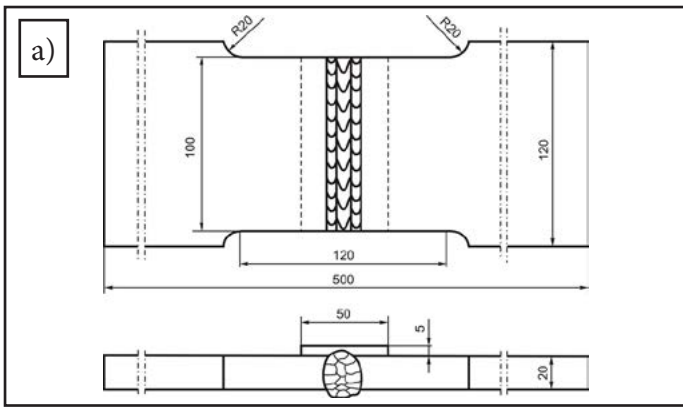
Shape and dimensions of the specimens subjected to fatigue tests:
